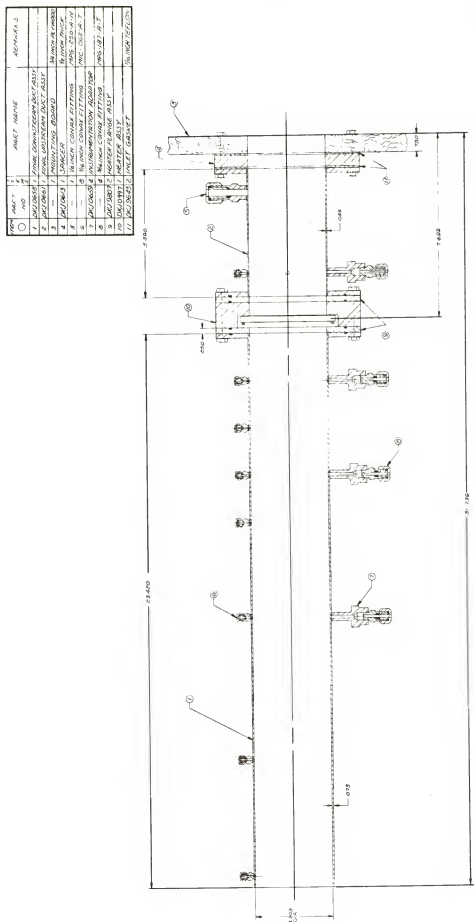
Rijke thermoacoustic instability rig assembly drawing.
